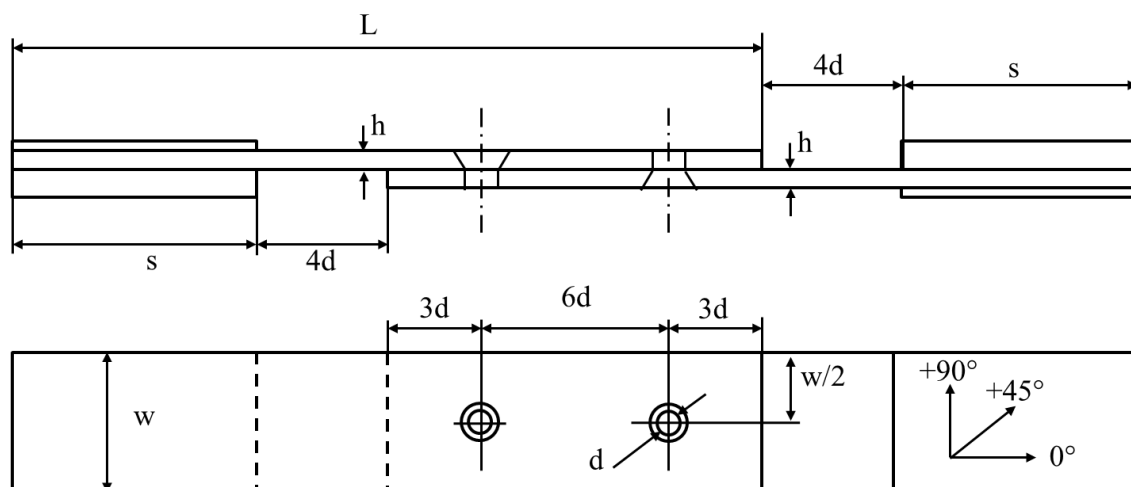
Specimen geometry for two bolts, all dimensions are in millimetre [mm].
